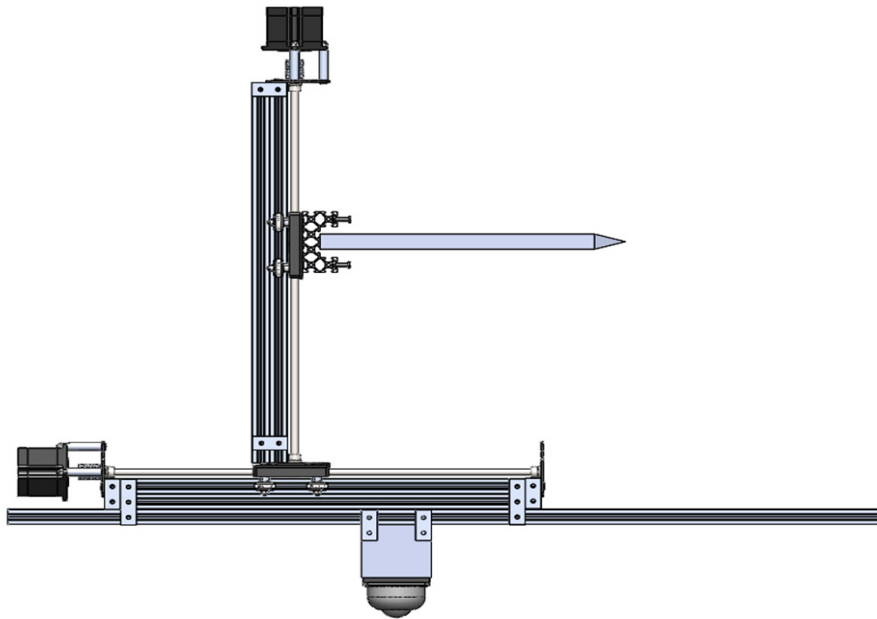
Final Solidworks design model of subsystem 2: antenna mount assembly.
